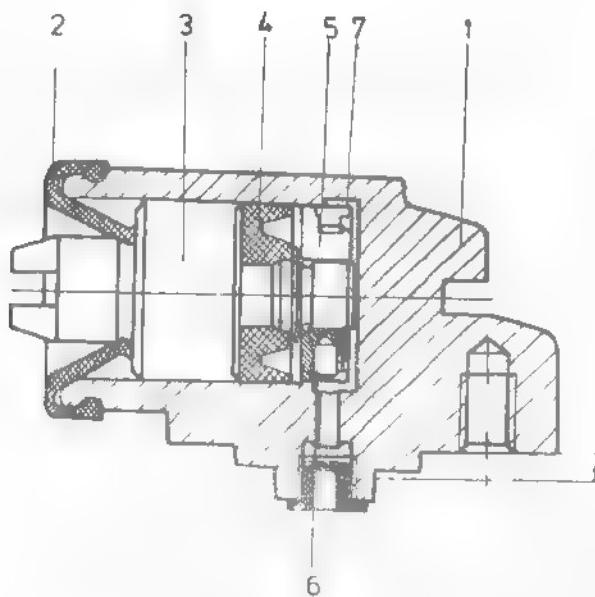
FRONT WHEEL BRAKE CYLINDER.
